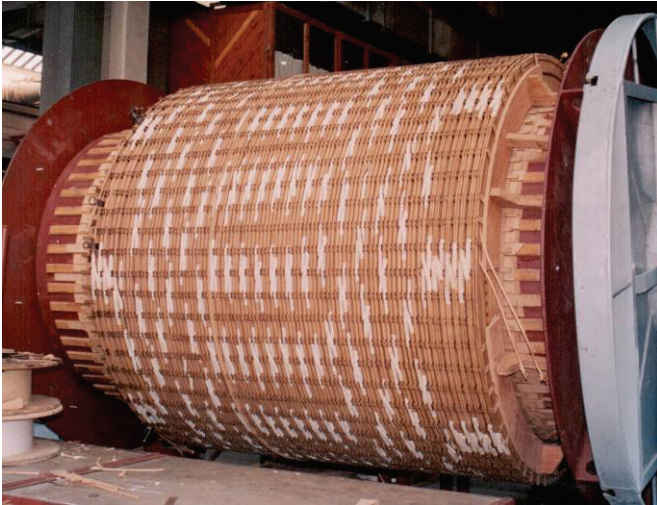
Making the windings for 112 MVA power transformer on horizontal winding machine
